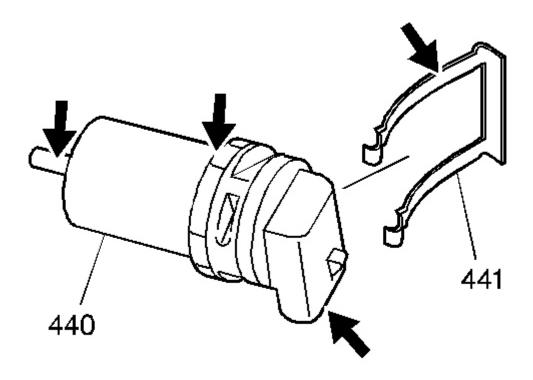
Inspecting Input Speed Sensor Courtesy of GENERAL MOTORS CORP.
